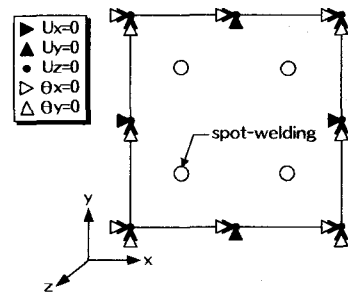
Boundary condition of a rectangular plate spot-welded
